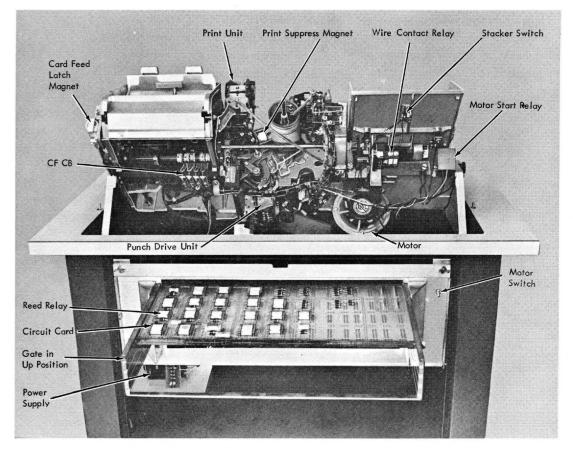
IBM 29, Rear View (Covers Off), Reed Relay Machine
